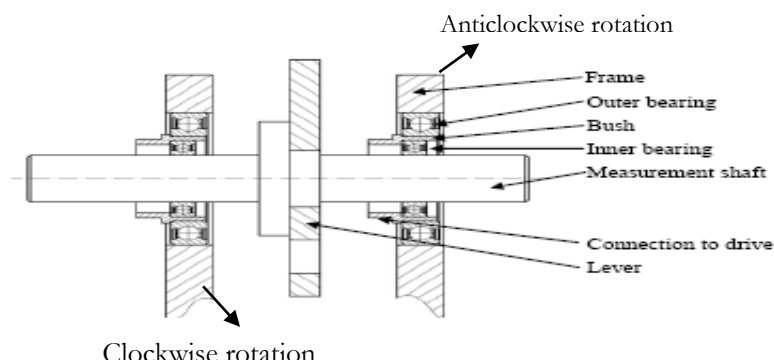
Counter rotating bearings in 2 kN·m torque calibration machine (MIKES)
